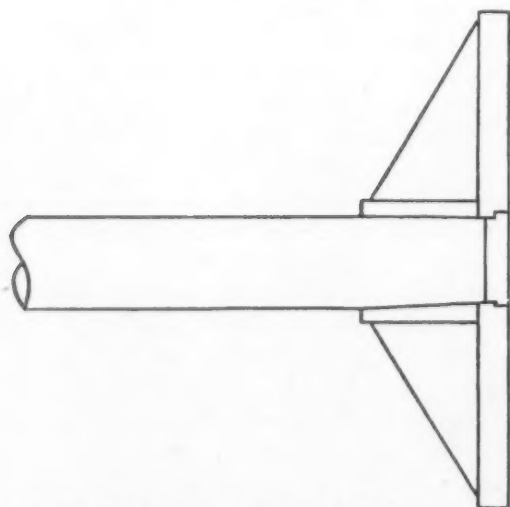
TAPER FIT METHOD OF ATTACHING FACE-PLATE TO SHAFT.
